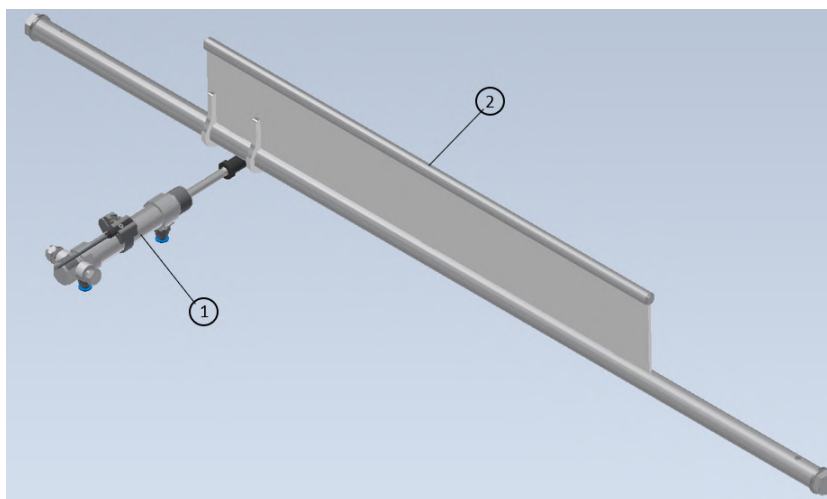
1) Pneumatic cylinder and 2) stopper weld assembly
